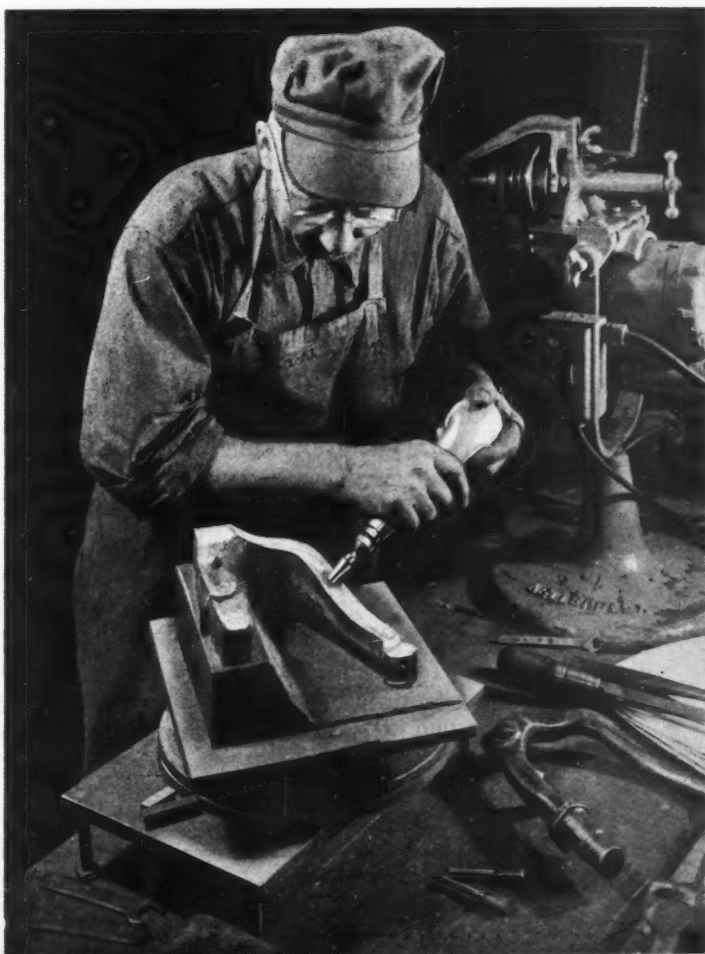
This carbide bur, running at 21,000 R.P.M., is employed to remove tool marks and to blend forms in a forging die
